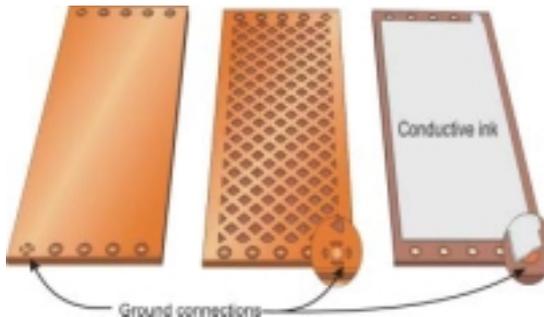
Ground planes should be crosshatched if possible to improve flexibility. Clearance holes prevent shorting. Ground connections should be relieved to reduce heat sinking when soldering.
